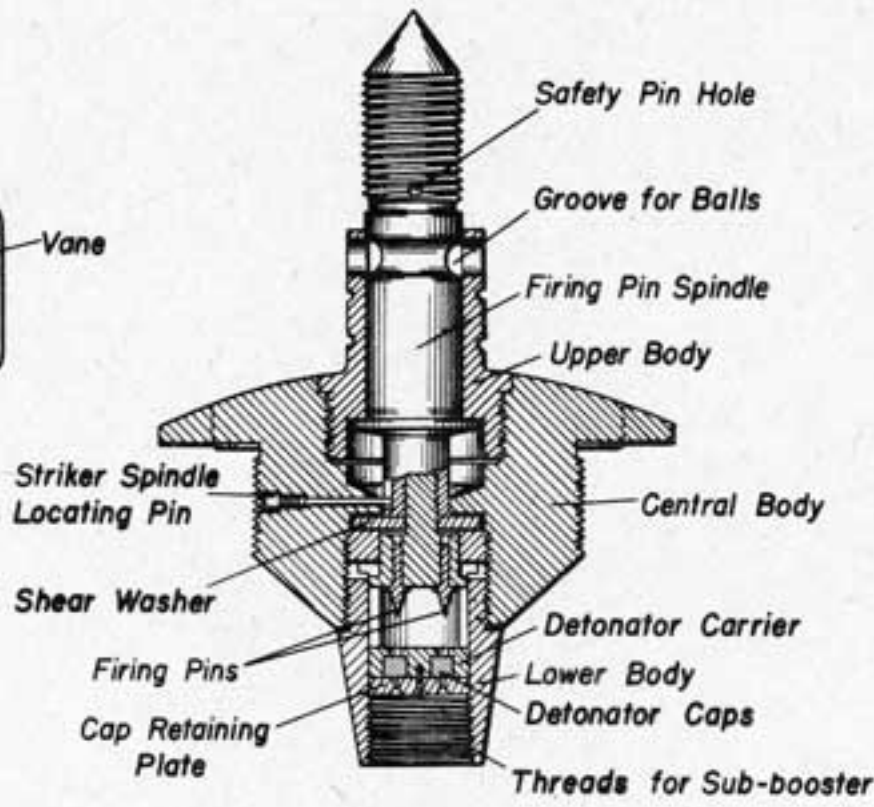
Type B Nose Fuze, Arming Vane Removed, Sectional View
